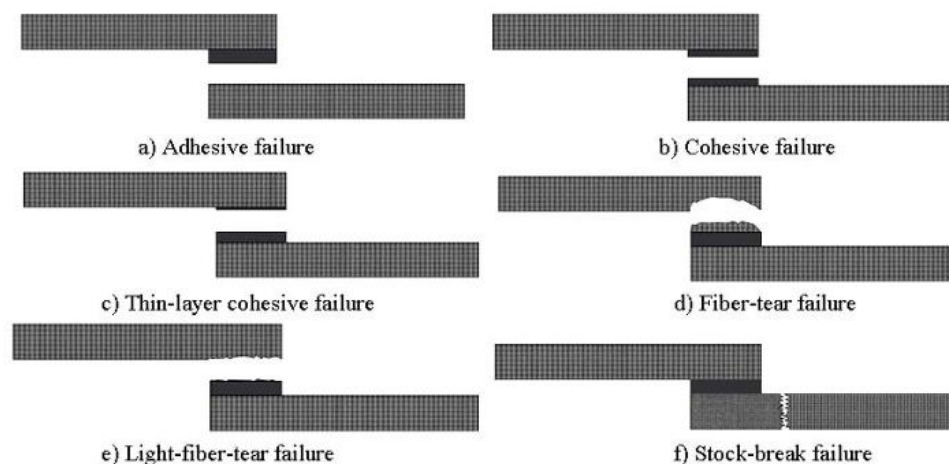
Failure modes of an adhesive joint (Banea & da Silva, 2009)
